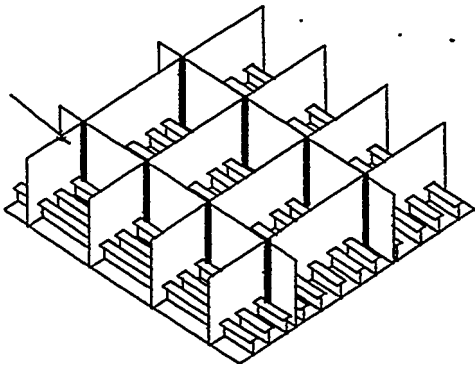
Example of robot welding macros for double bottom assemblies.
